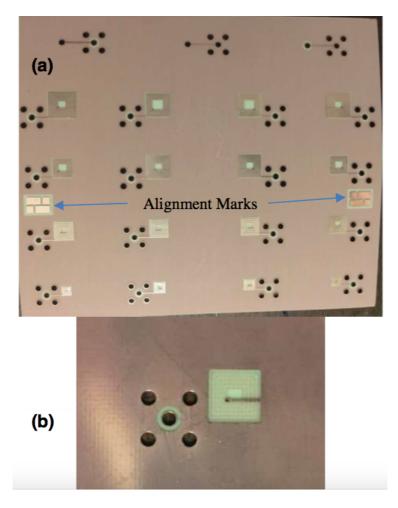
Inductor structure patterning on both sides of the flexible 0.2 mm PWB (a) full view of a 12 cm by 10 cm fabricated board top layer (b) Bottom layer with the cutout/void shown
